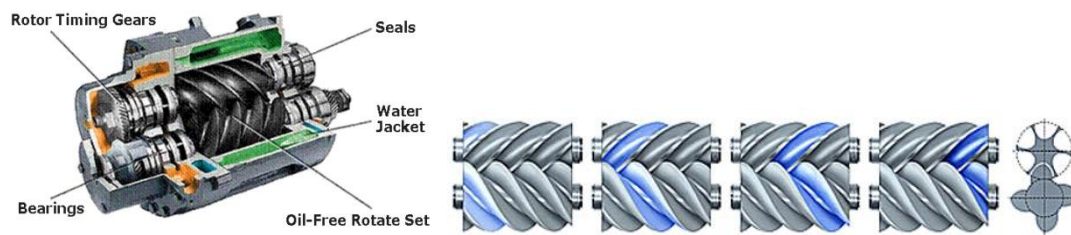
Cross Section of a Representative Rotary Screw Compressor (64)
